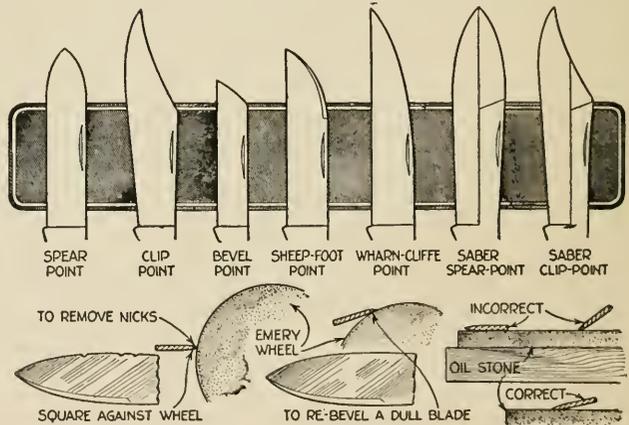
Some of the more common shapes for pocketknife and jackknife blades; how to remove nicks and regrind and hone a dull blade.
